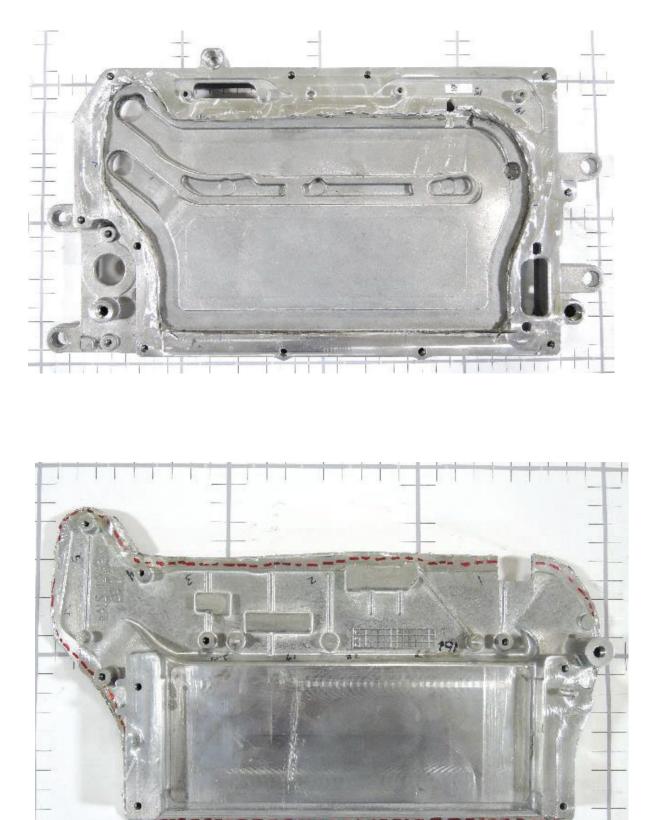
Audi Base Cooling Plate, Interior Coolant Passage
